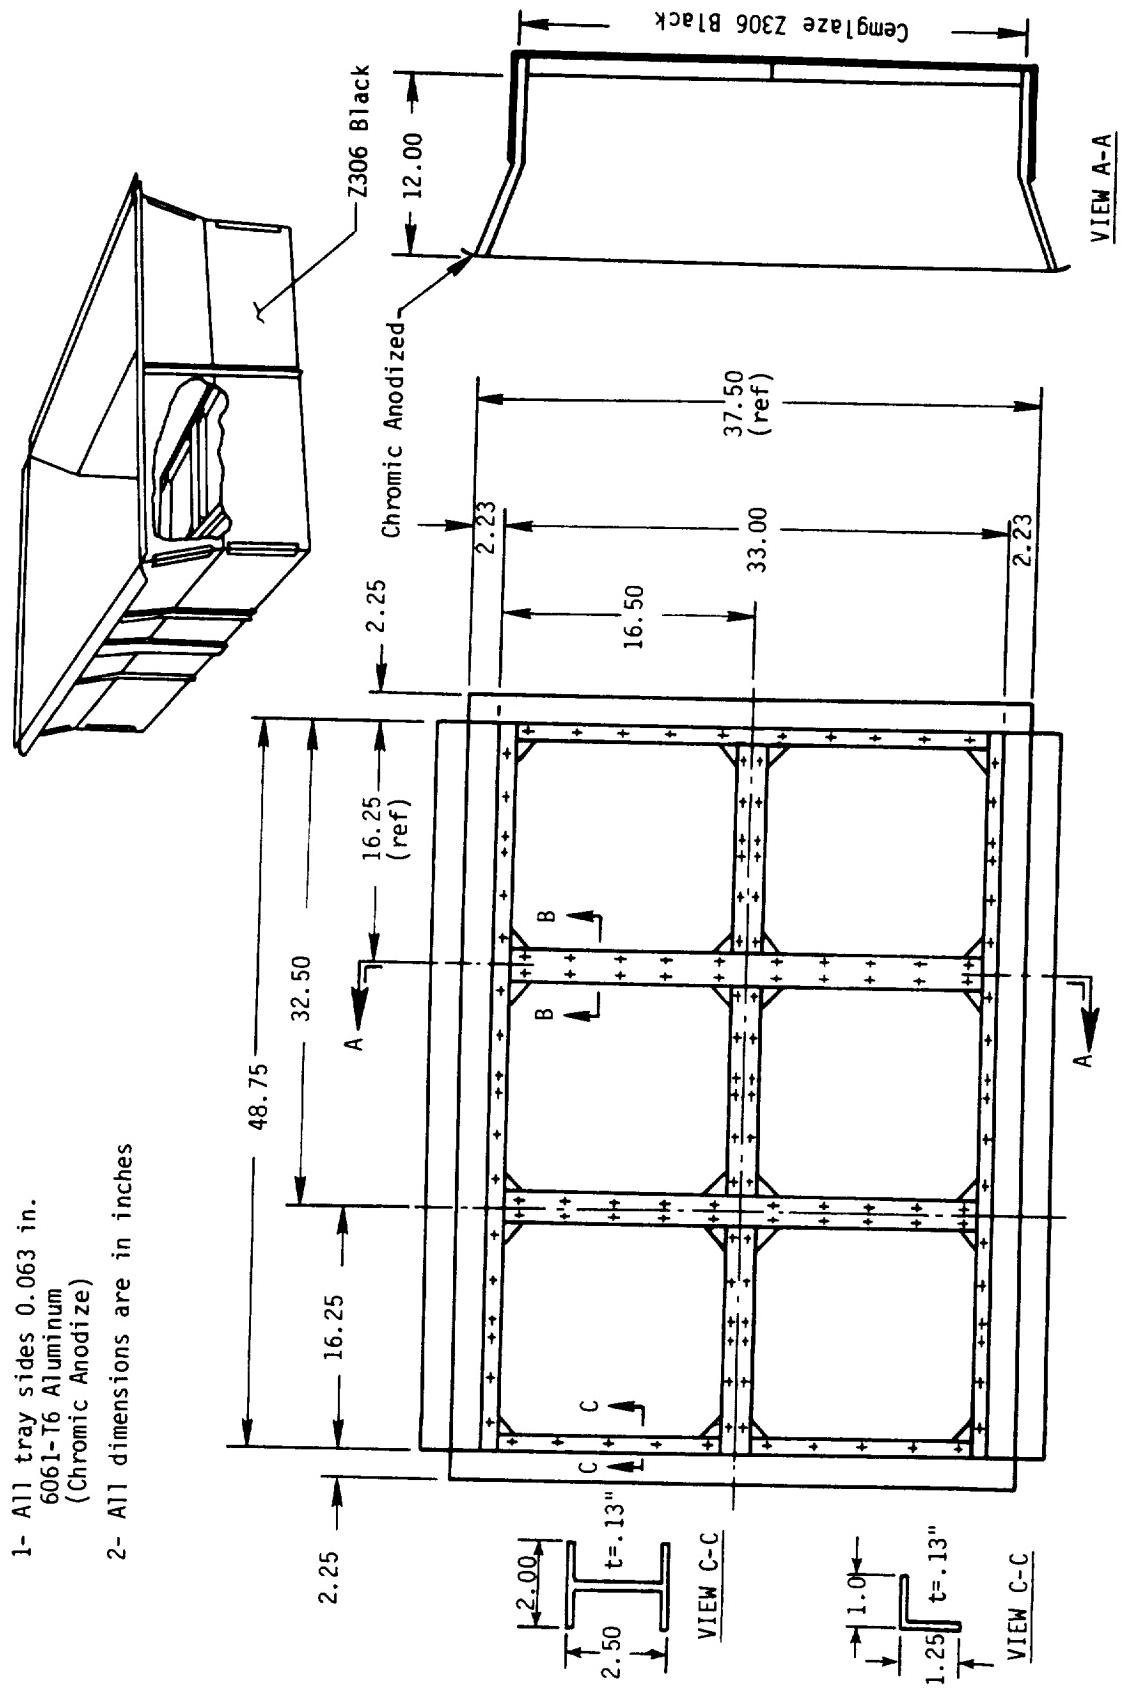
LDEF Peripheral Tray Assembly - 12 Inch Tray
